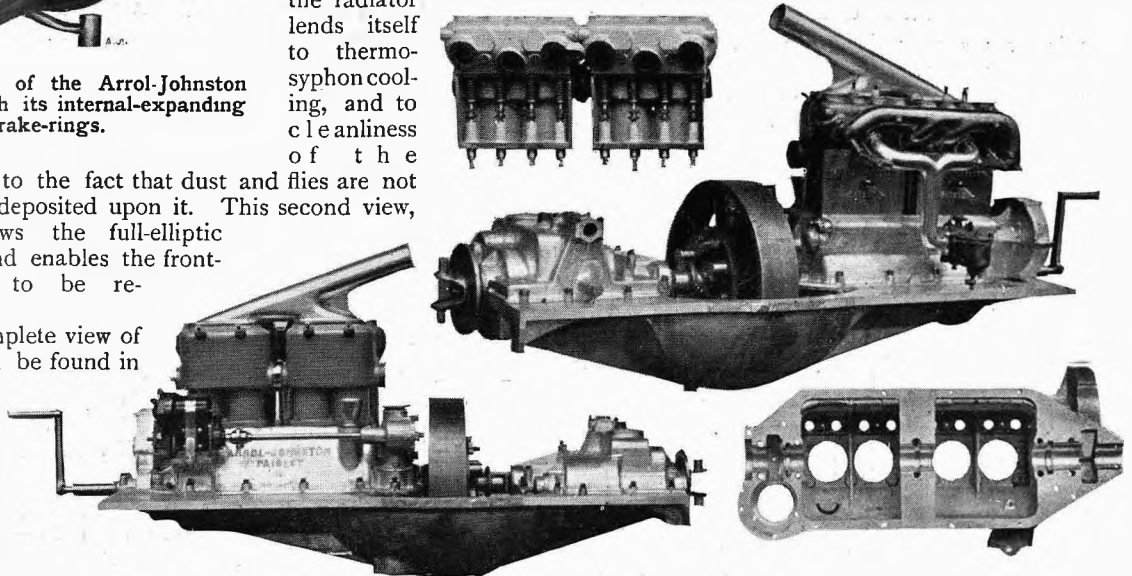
Two views of the complete engine, clutch and gear-box unit, together with separate views of the two cylinder-castings and of the upper crank-chamber casting.
